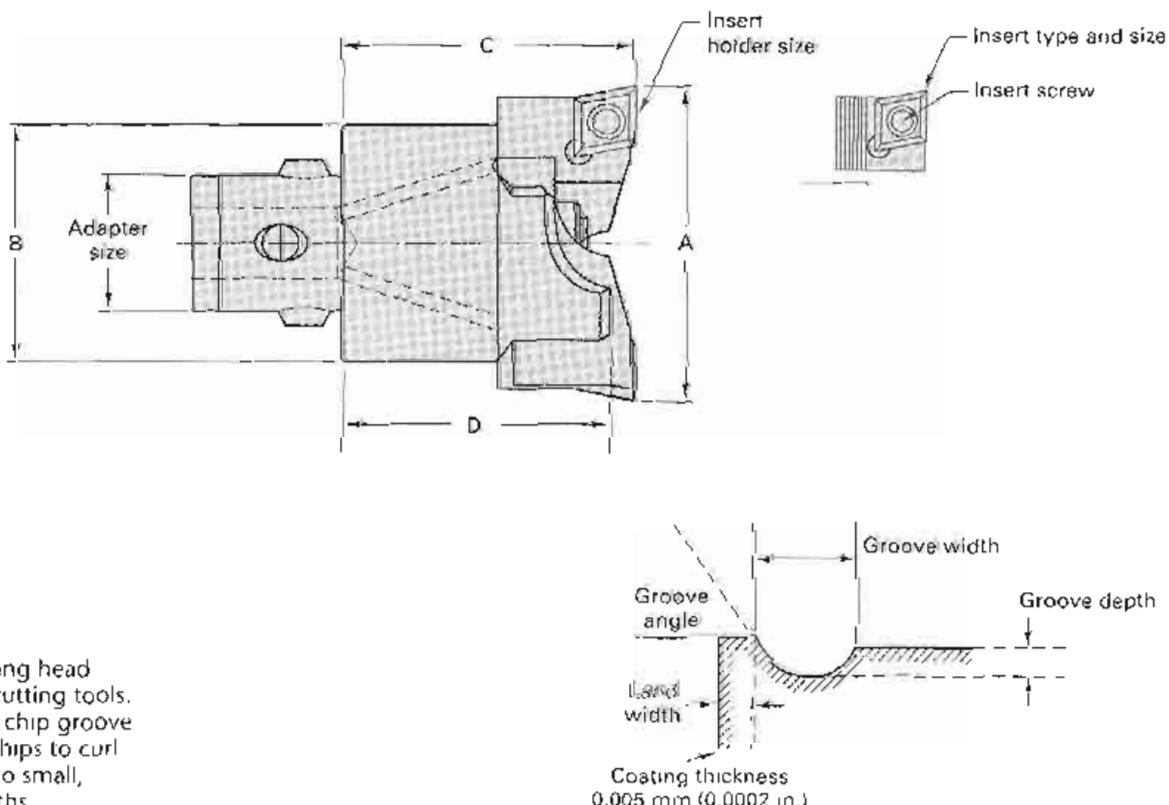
Boring head with carbide insert cutting tools. These inserts have a chip groove that can cause the chips to curl tightly and break into small, easily disposed lengths.
